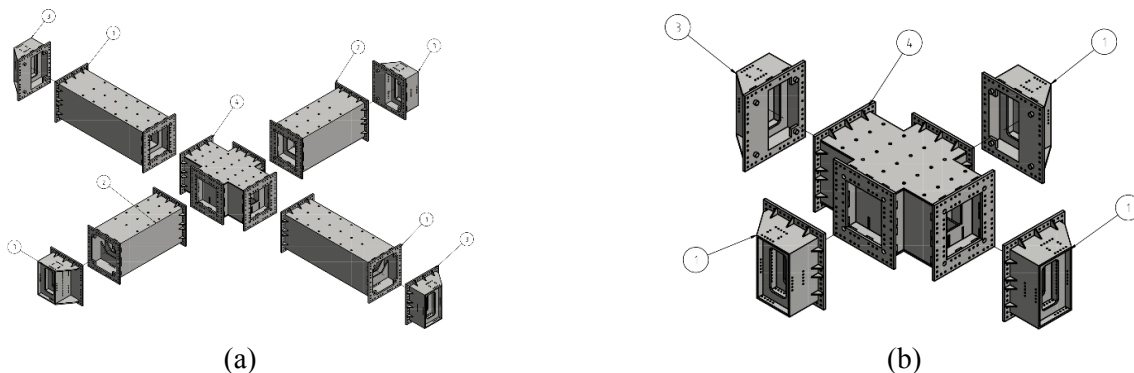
Exploded view of the MAST crosshead: (a) long-arm configuration; (b) short-arm configuration.
